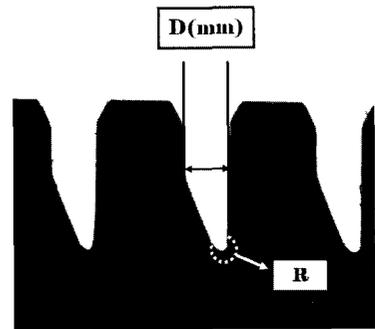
Measurement shape of the specimen(Ø=0.05mm)
